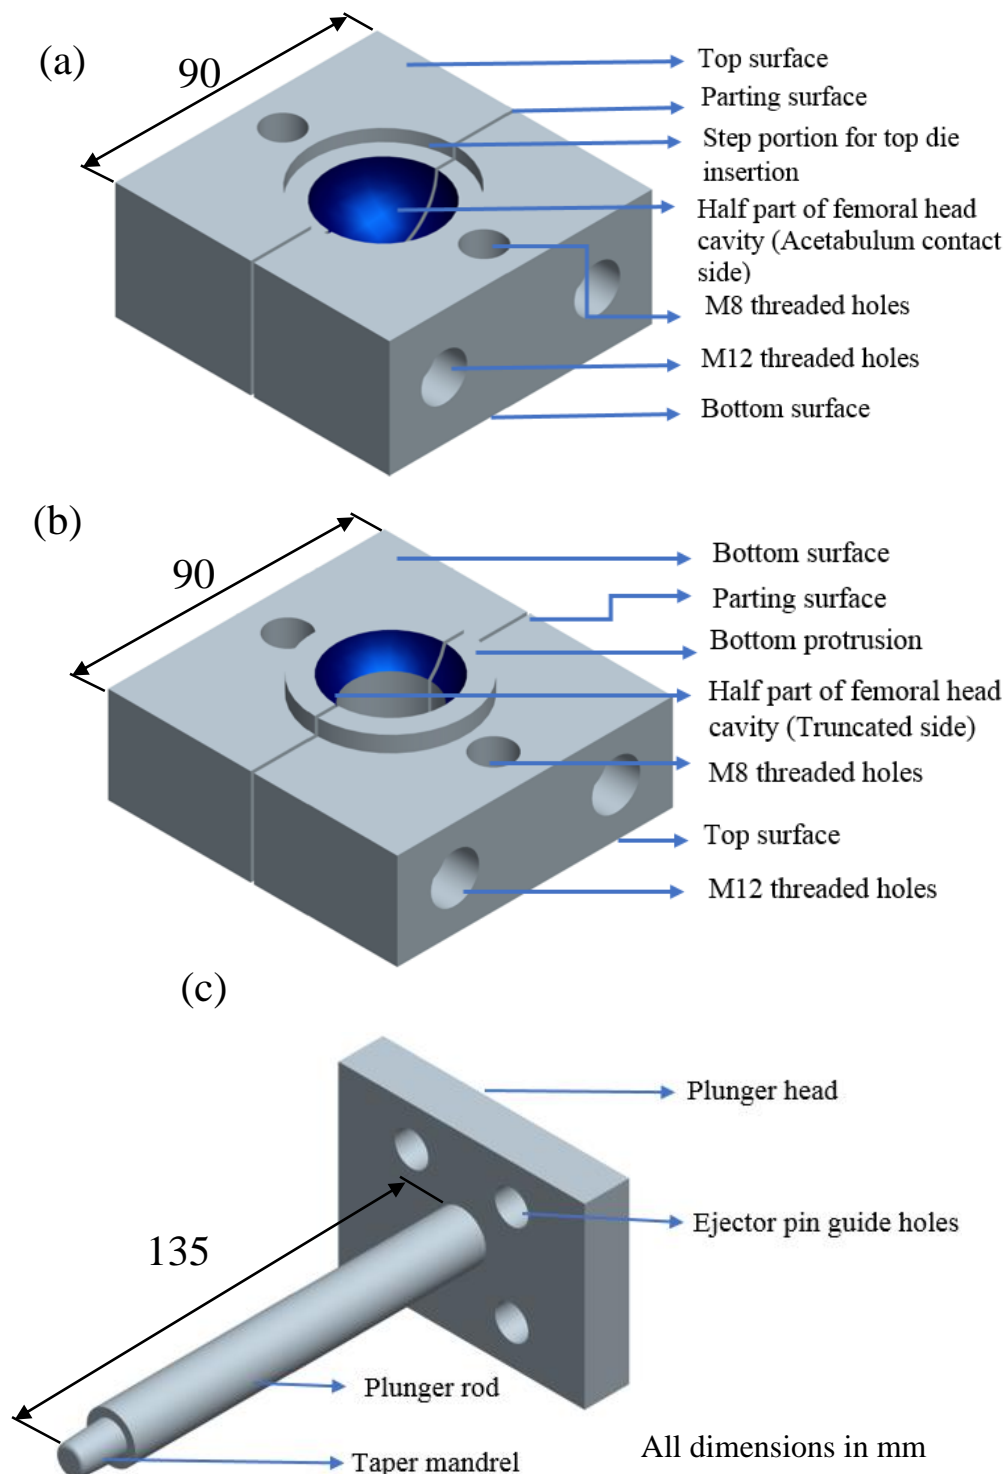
Typical multi-piece steel die fabricated with consideration of polymer prototype component dimension, where design and drawing of cavity including plunger are shown for femoral head, where (a) bottom die, (b) top die, and (c) plunger cum mandrel.
